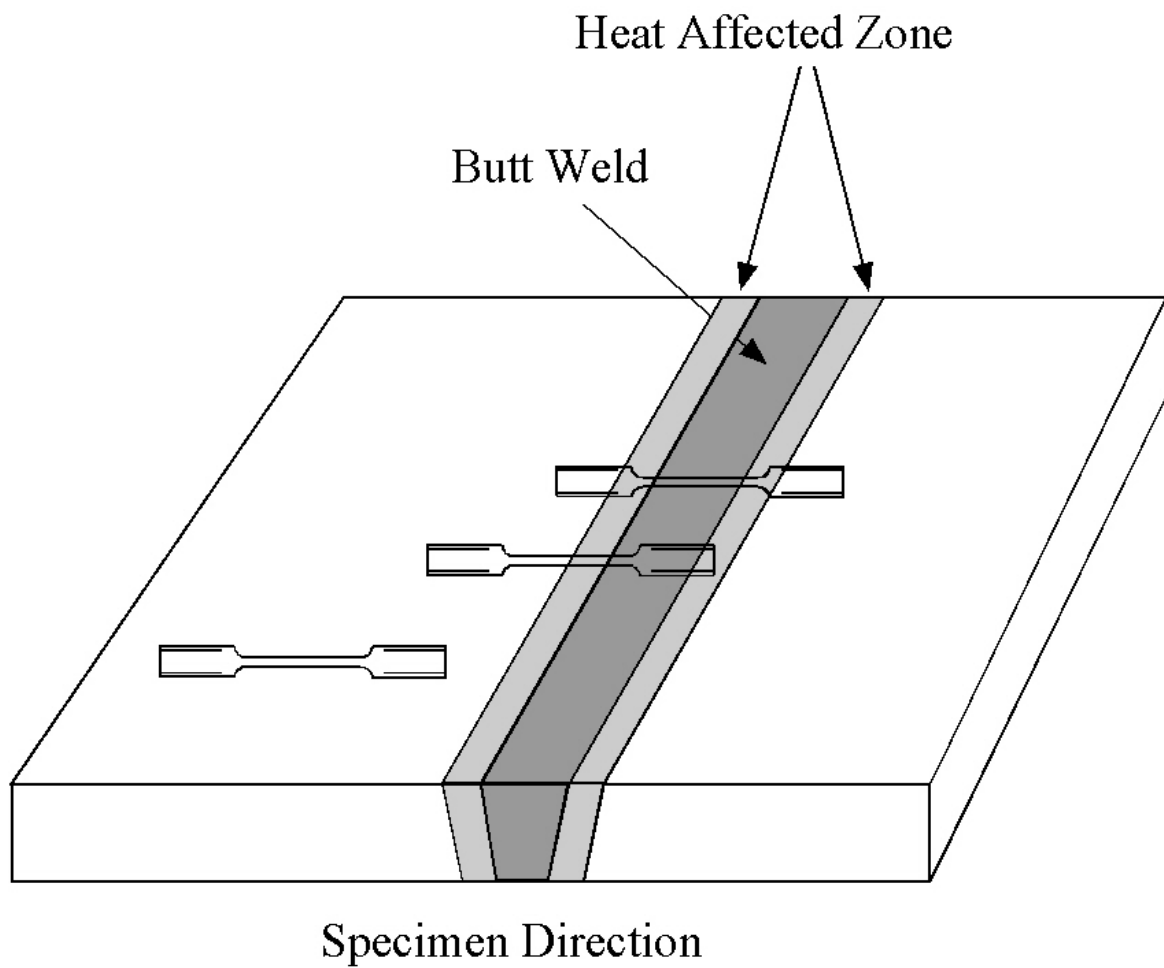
Sketch of welded plate for specimen fabrication.
